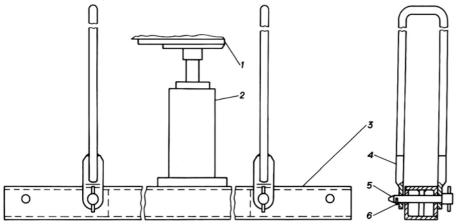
Spring installation tool: 1 - spring; 2 - jack; 3 - beam; 4 - U-bolt; 5 - pin; 6 - latch
